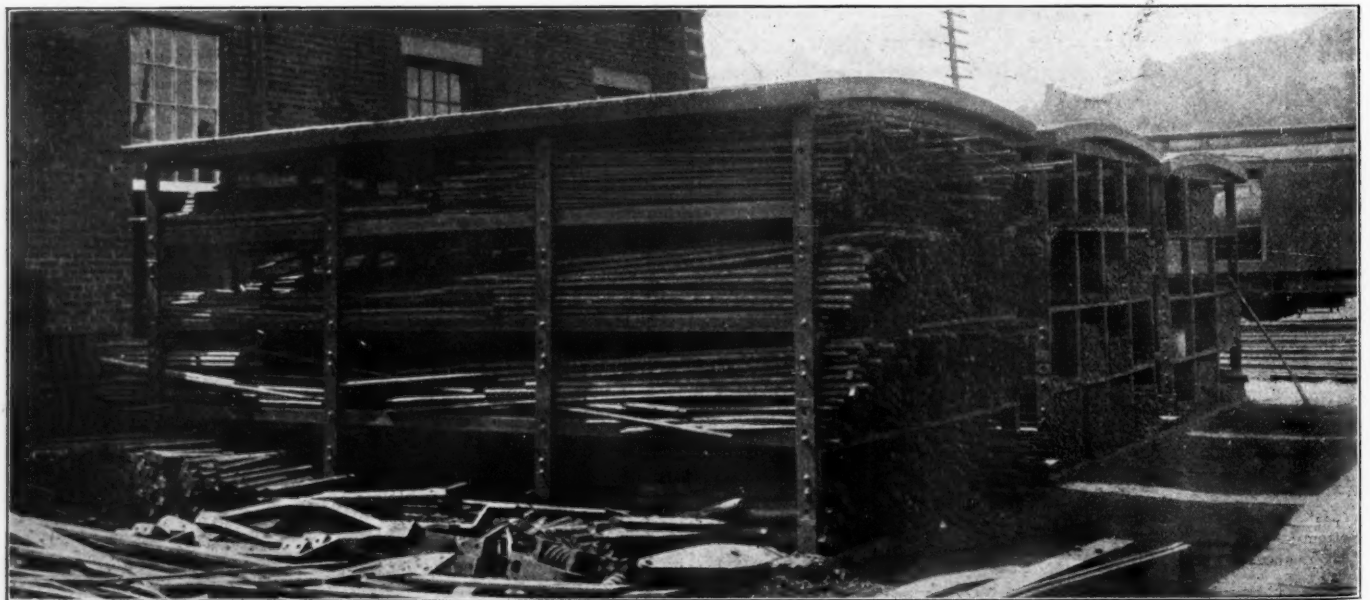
Iron Racks for Storage of Second-Hand Wrought Iron.
